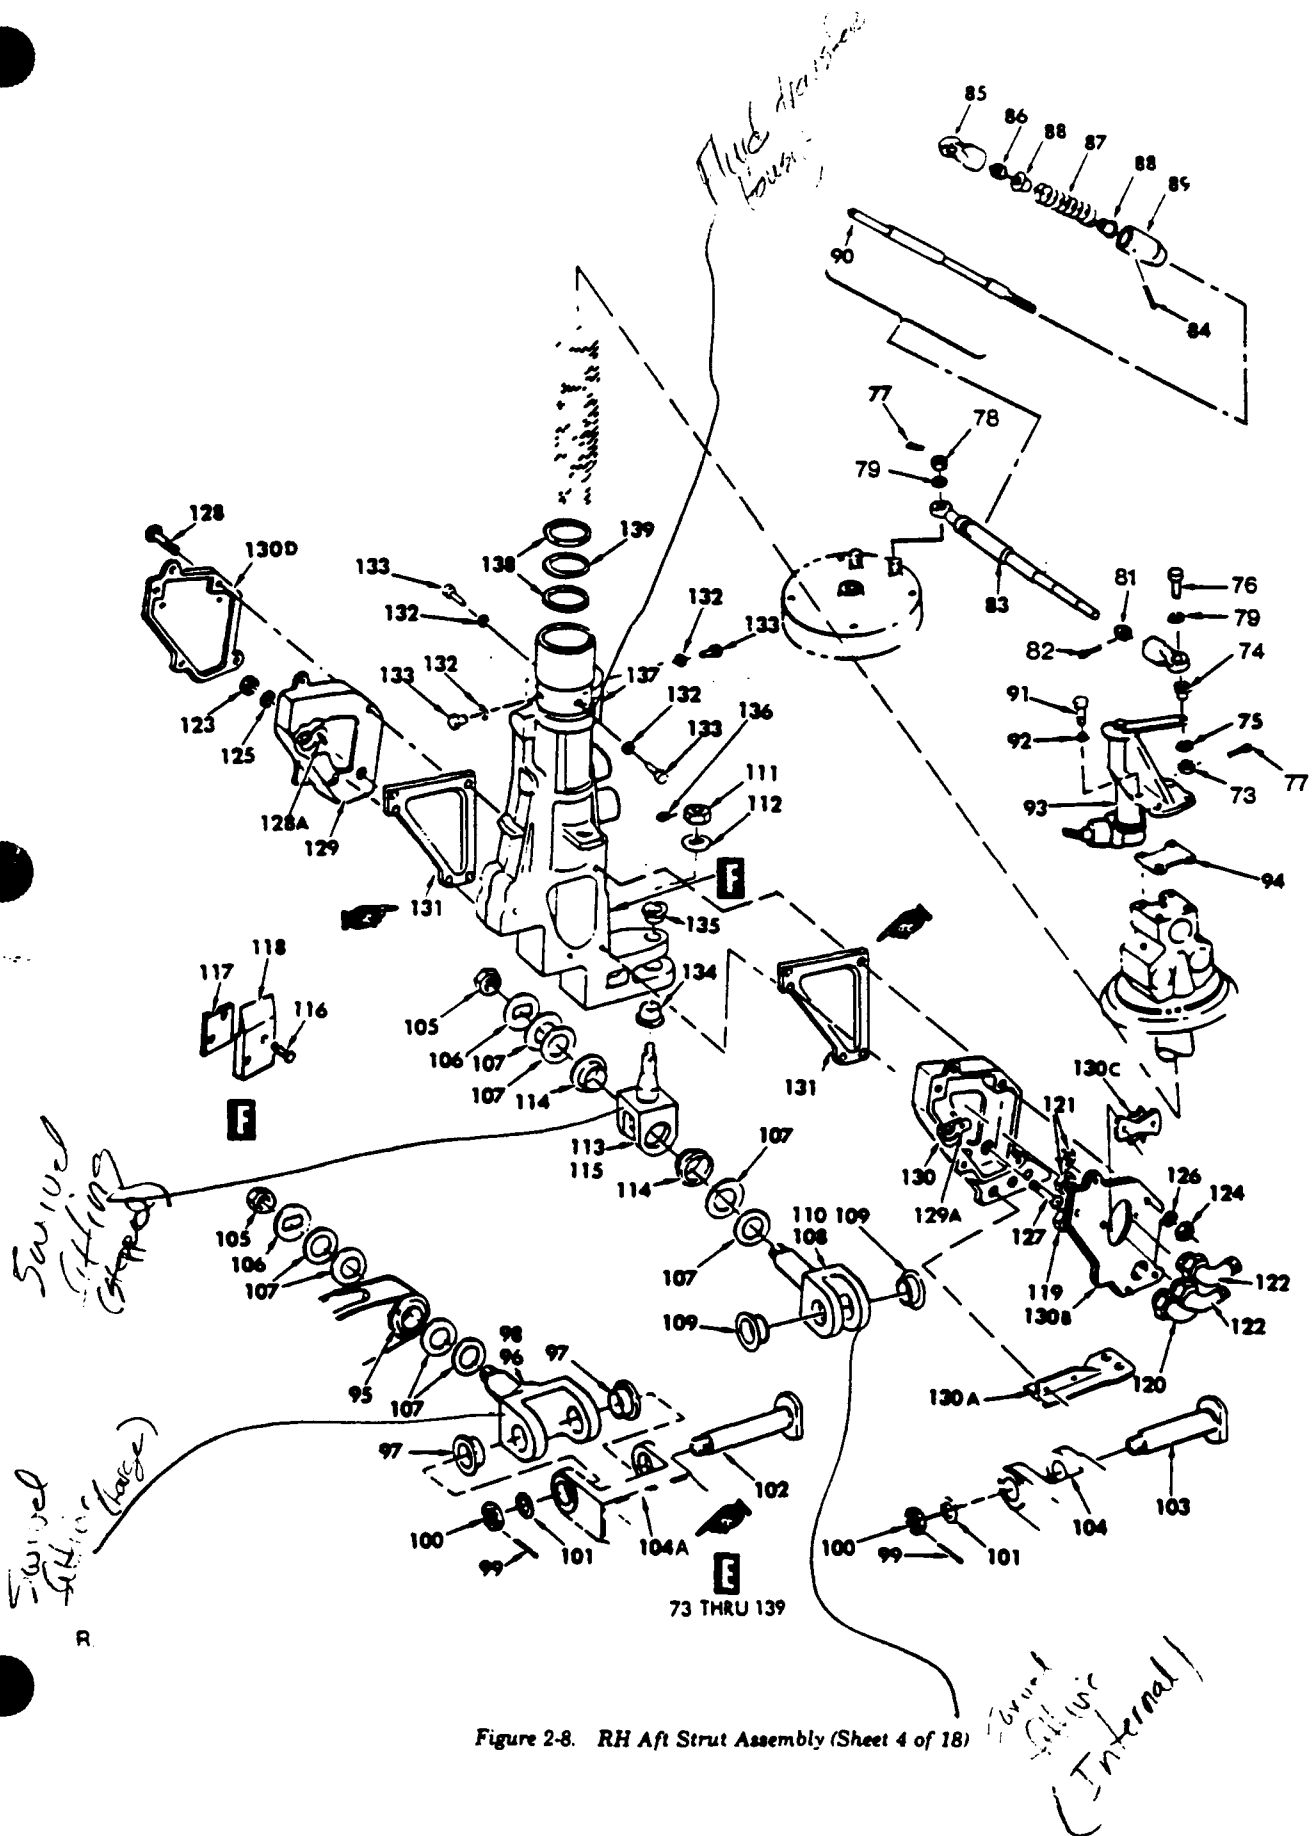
RH Aft Strut Assembly (Sheet 4 of 18)
